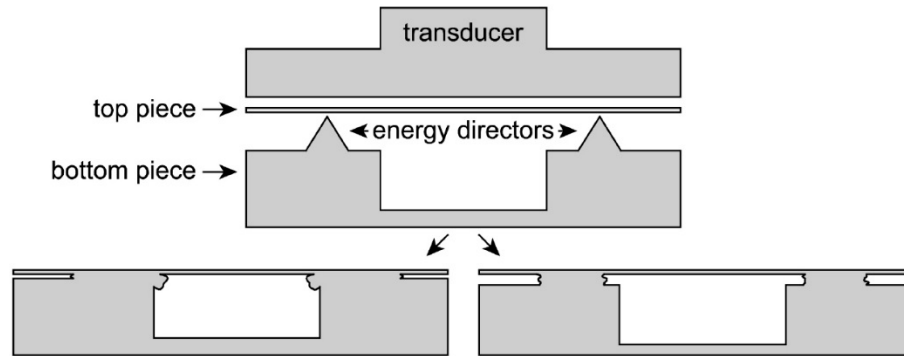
Cross-sectional sketch of a microfluidic channel with energy directors on each side, being welded to a sheet. Two cases can be the outcome of the welding. Either flash is generated *i.e.* polymer flowing into the channel, or the welding is incomplete, leaving a tiny gap at the top of the channel. In either case, the welding results in an added height. Figure adapted from Paper 1.
